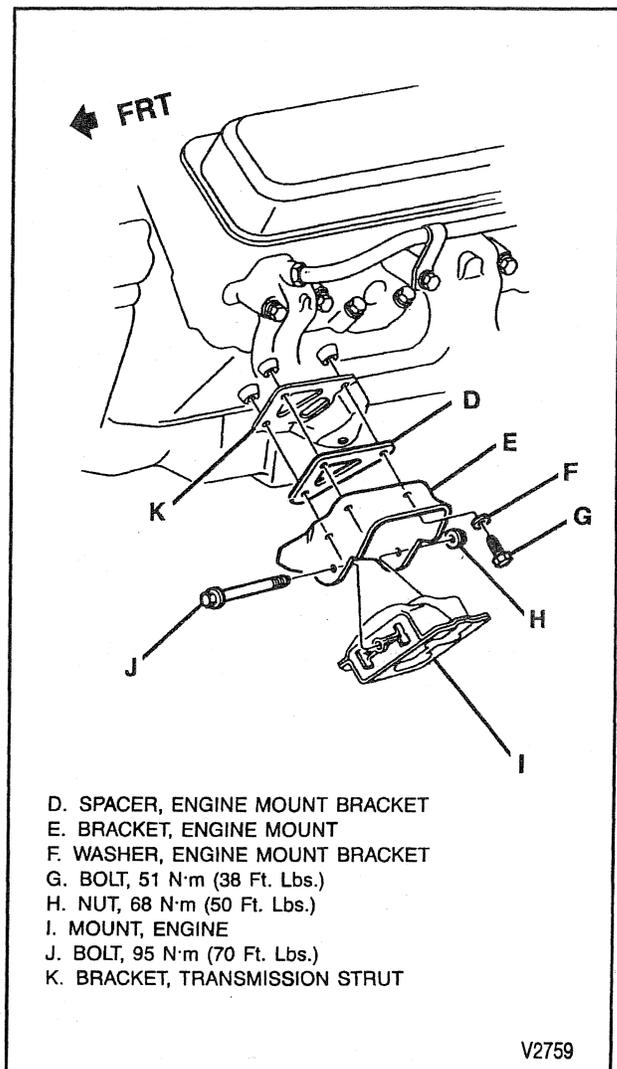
Front Engine Mounting Brackets (2WD and 4WD Models)
